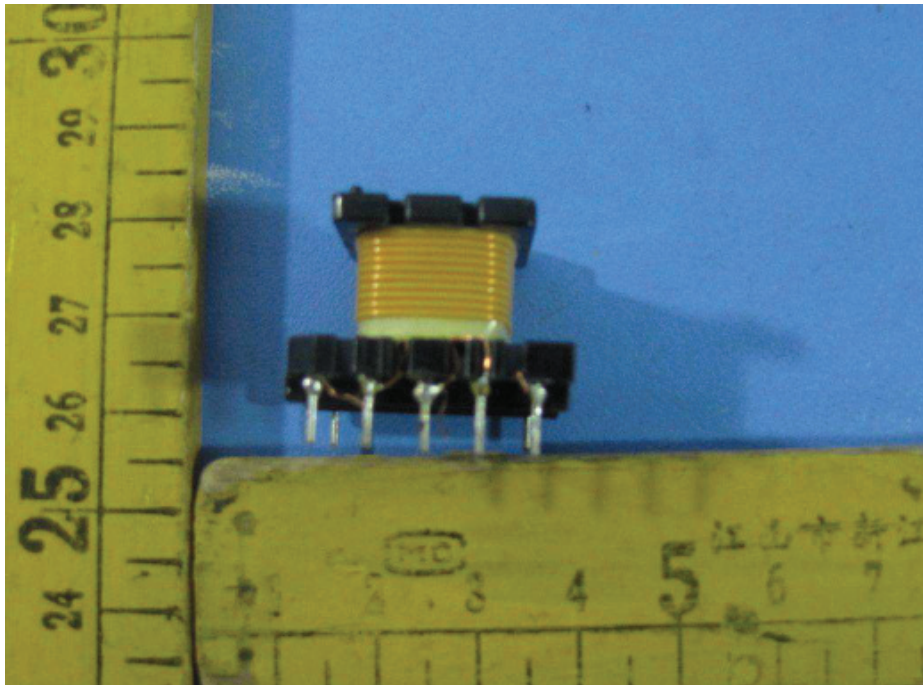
Internal view of transformer (margin tape used to separate primary leads and secondary winding where they are crossing)
